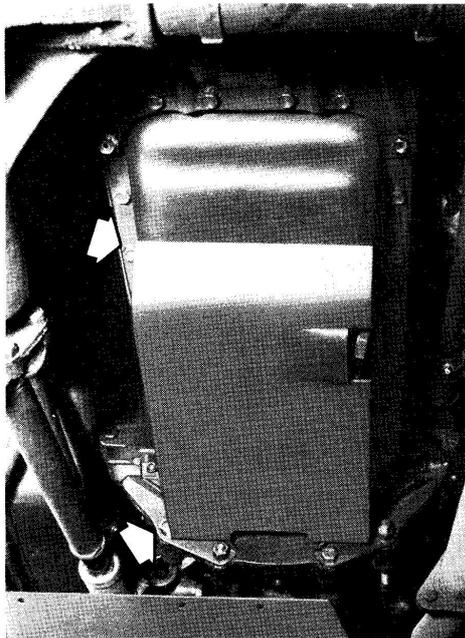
Bolts to be removed from clutch housing and oil pan.
